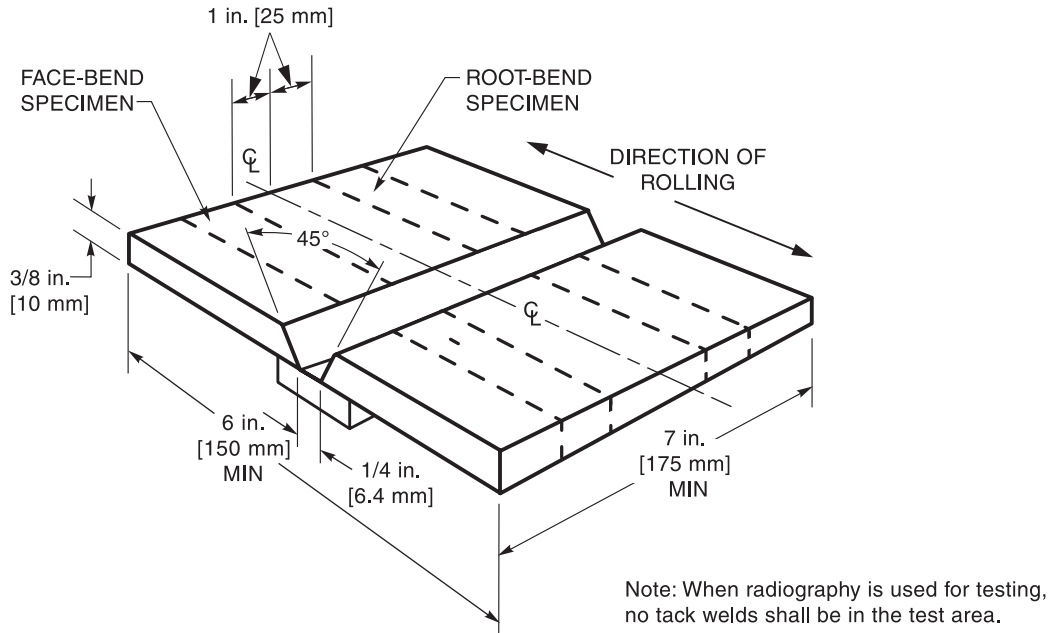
A—Test Plate for Limited Thickness, All Positions—Welder Qualification
